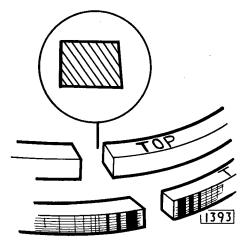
Showing the identification marks on the tapered periphery compression rings.
